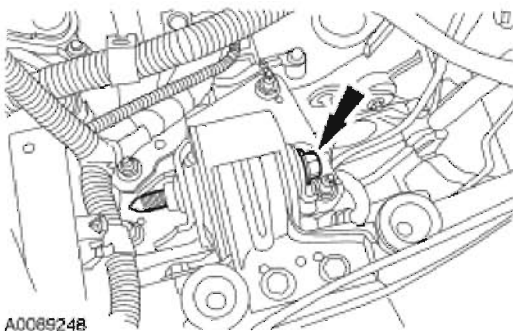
Locating Nuts & Engine Mount Bracket
